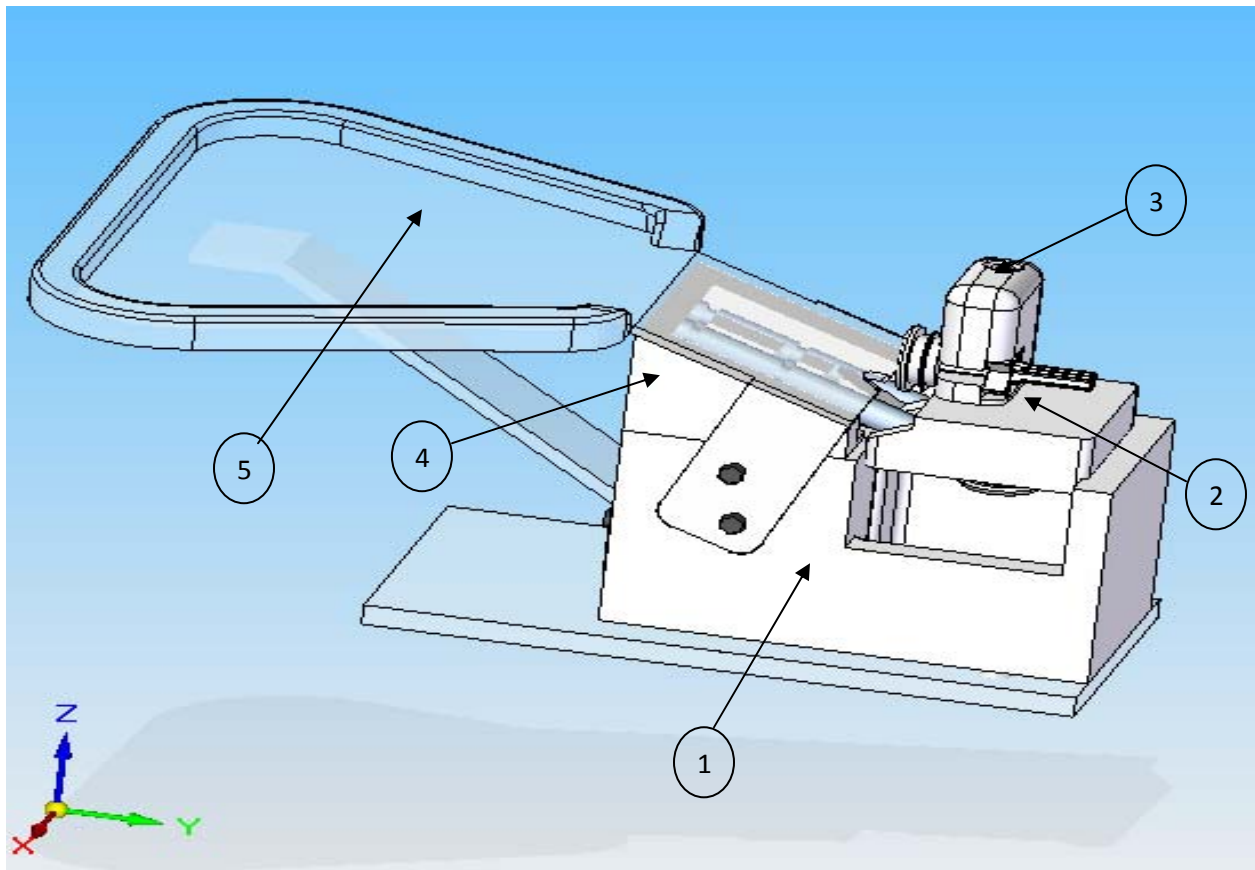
CAD Model of Large O-ring Fixture
